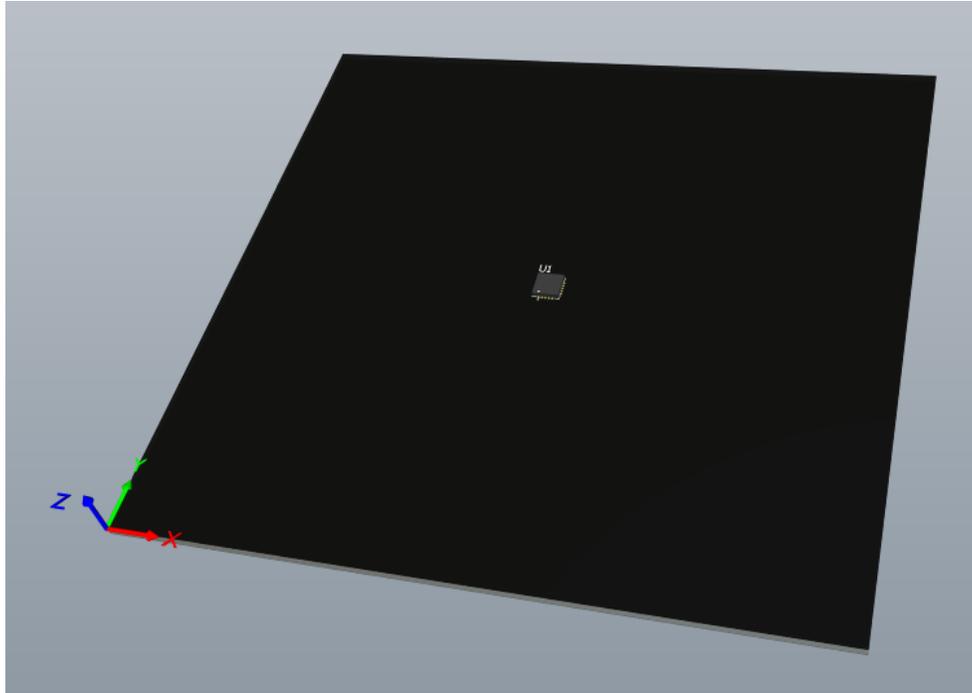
Thermal test board setup showing 127×127 mm PCB with QFN package placement and 62-mil board thickness.
